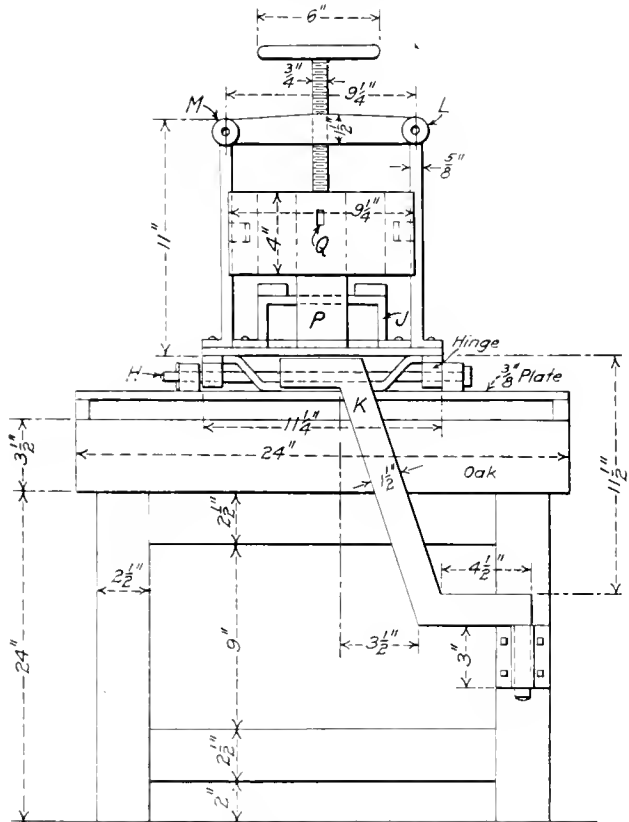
End View of Apparatus Used for Tining Crosshead Shoes.
